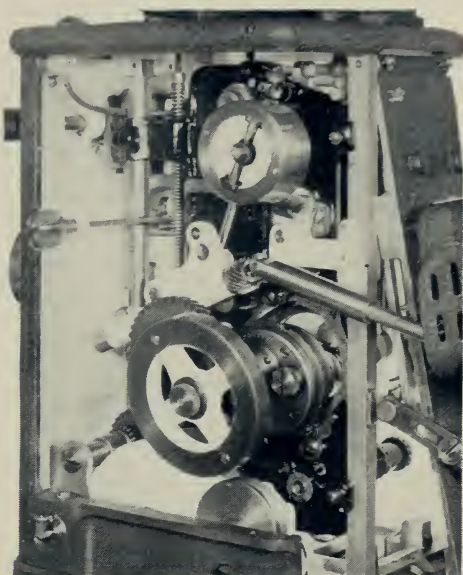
Gear side of the Model "K" showing intermittent movement in process of removal
